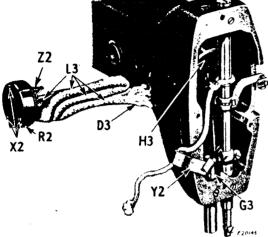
Replacing Wick and Holder in Head of Machine Arm
